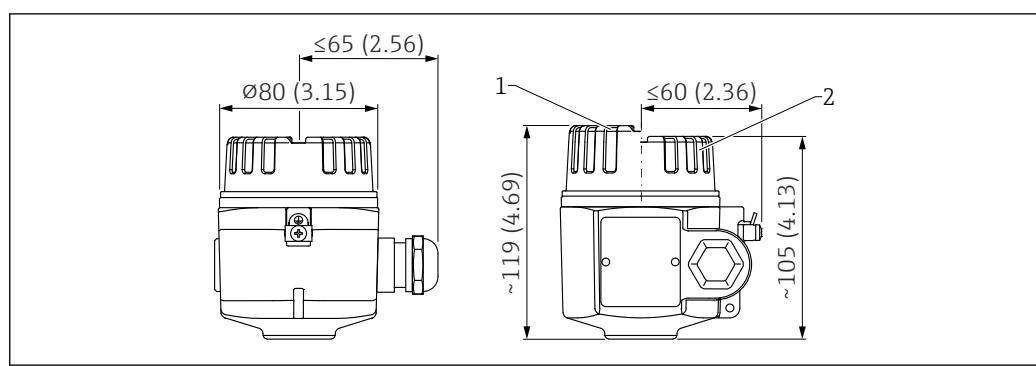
Dimensions of aluminum housing. Unit of measurement mm (in)
